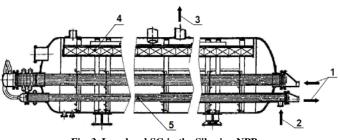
Low-head SG in the Siberian NPP: (1) primary inlet/outlet; (2) feedwater outlet; (3) steam outlet; (4) separation device; (5) heat-exchange tubes
